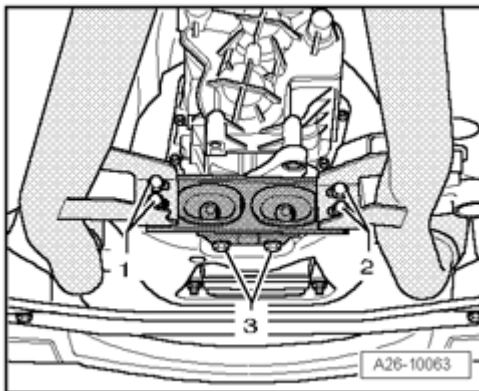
Removing/Installing Mounting Bolts For Front Exhaust Pipes
